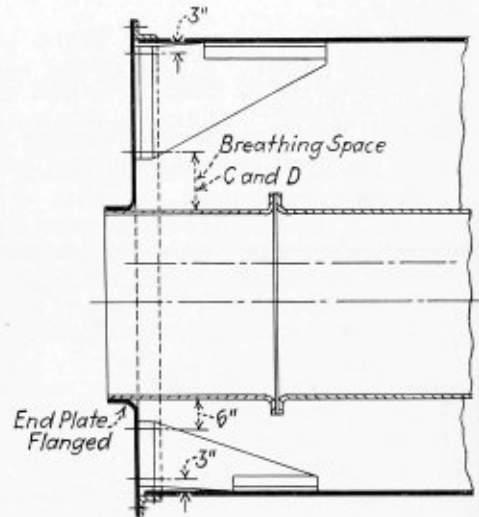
Details of End Plate Flanged Out for Flue Attachment
